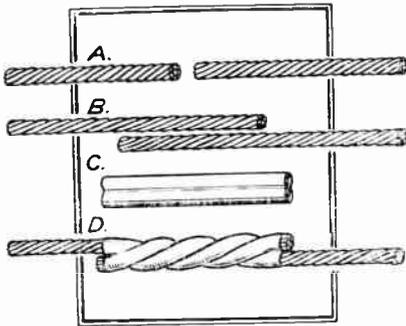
MAKING JOINTS IN ALUMINIUM CABLE.
